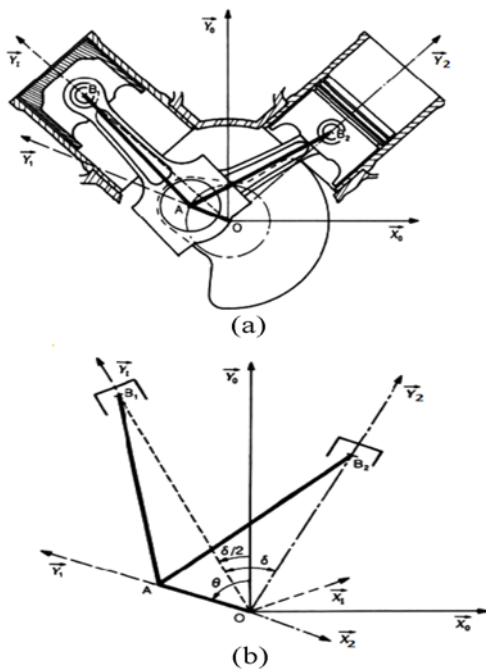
Defining reference for a engine with V-type cylinder: (a) Technological scheme; (b) Calculation scheme.
